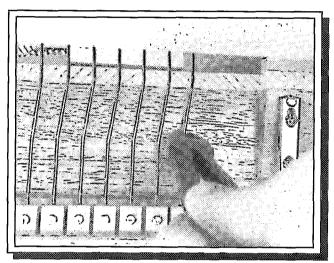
Adjusting the lower wire bend to eliminate side pressure of the damper wire in the guide rail bushing.
